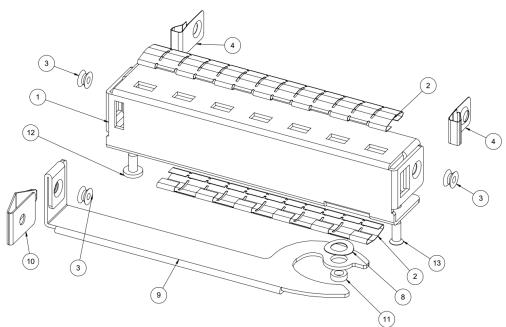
Small Card Generic I/O Bracket with a Latching Lever (3D View)
